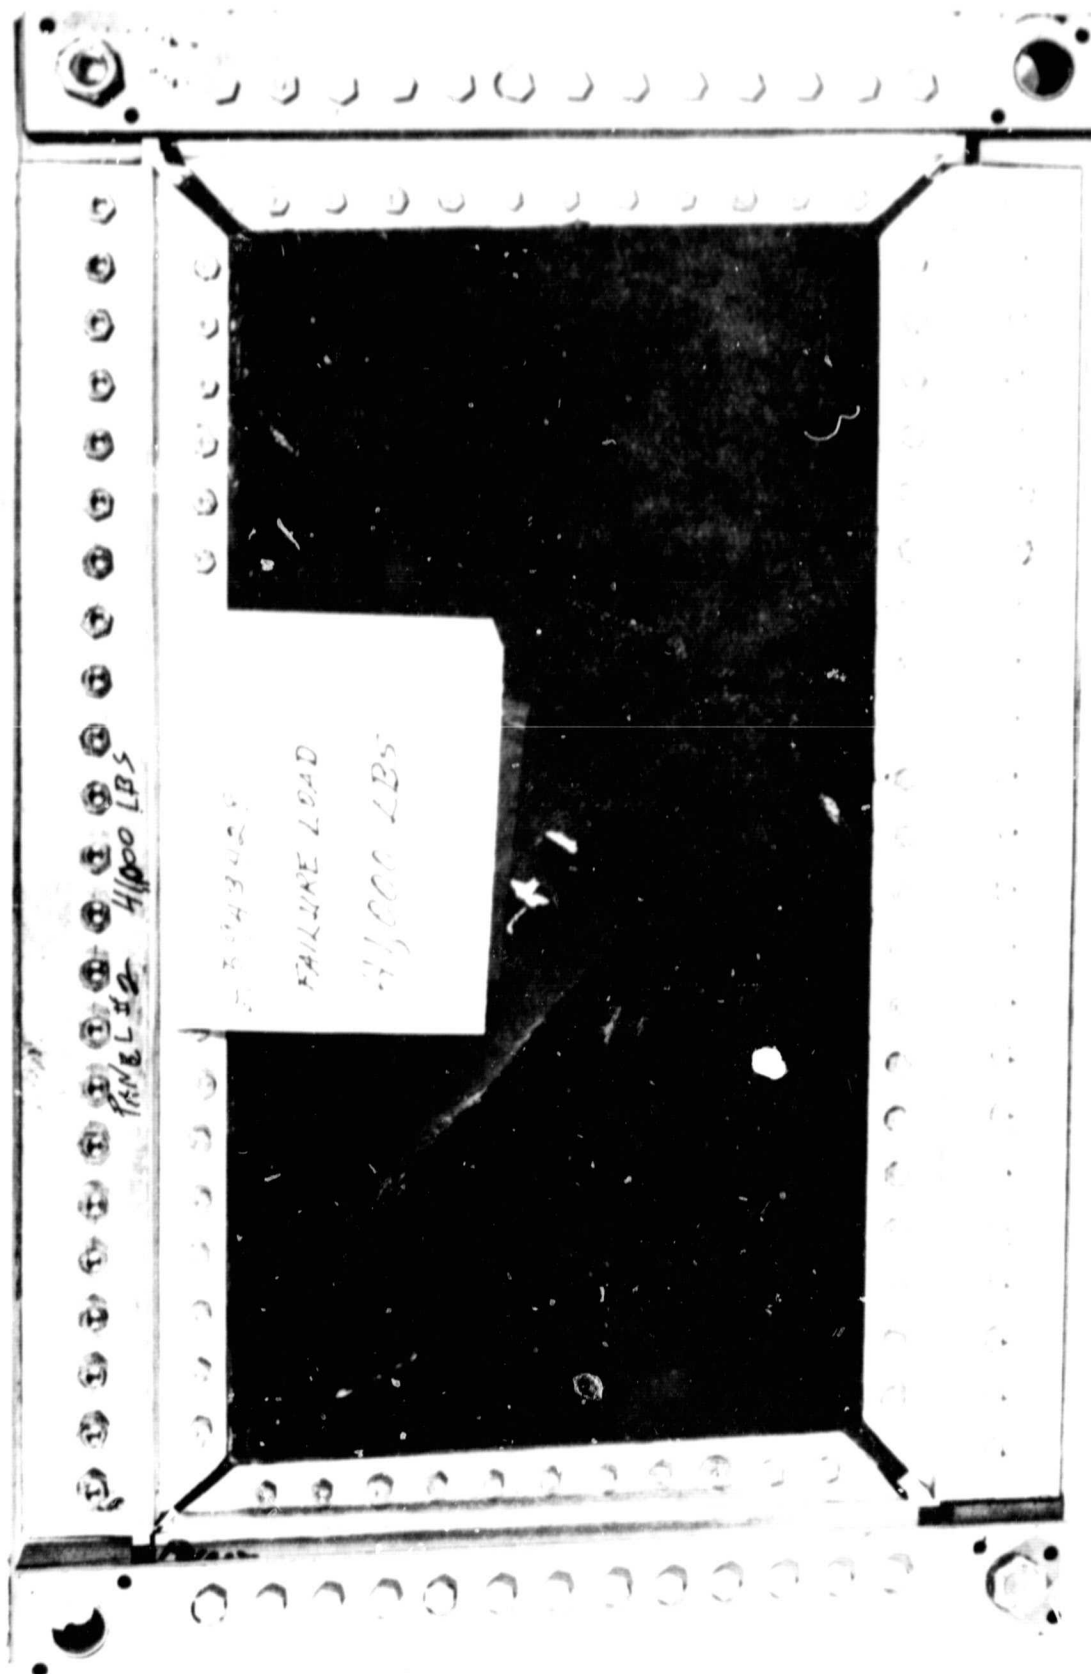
SECOND Z5943428-501 PANEL SHEAR TEST SPECIMEN
